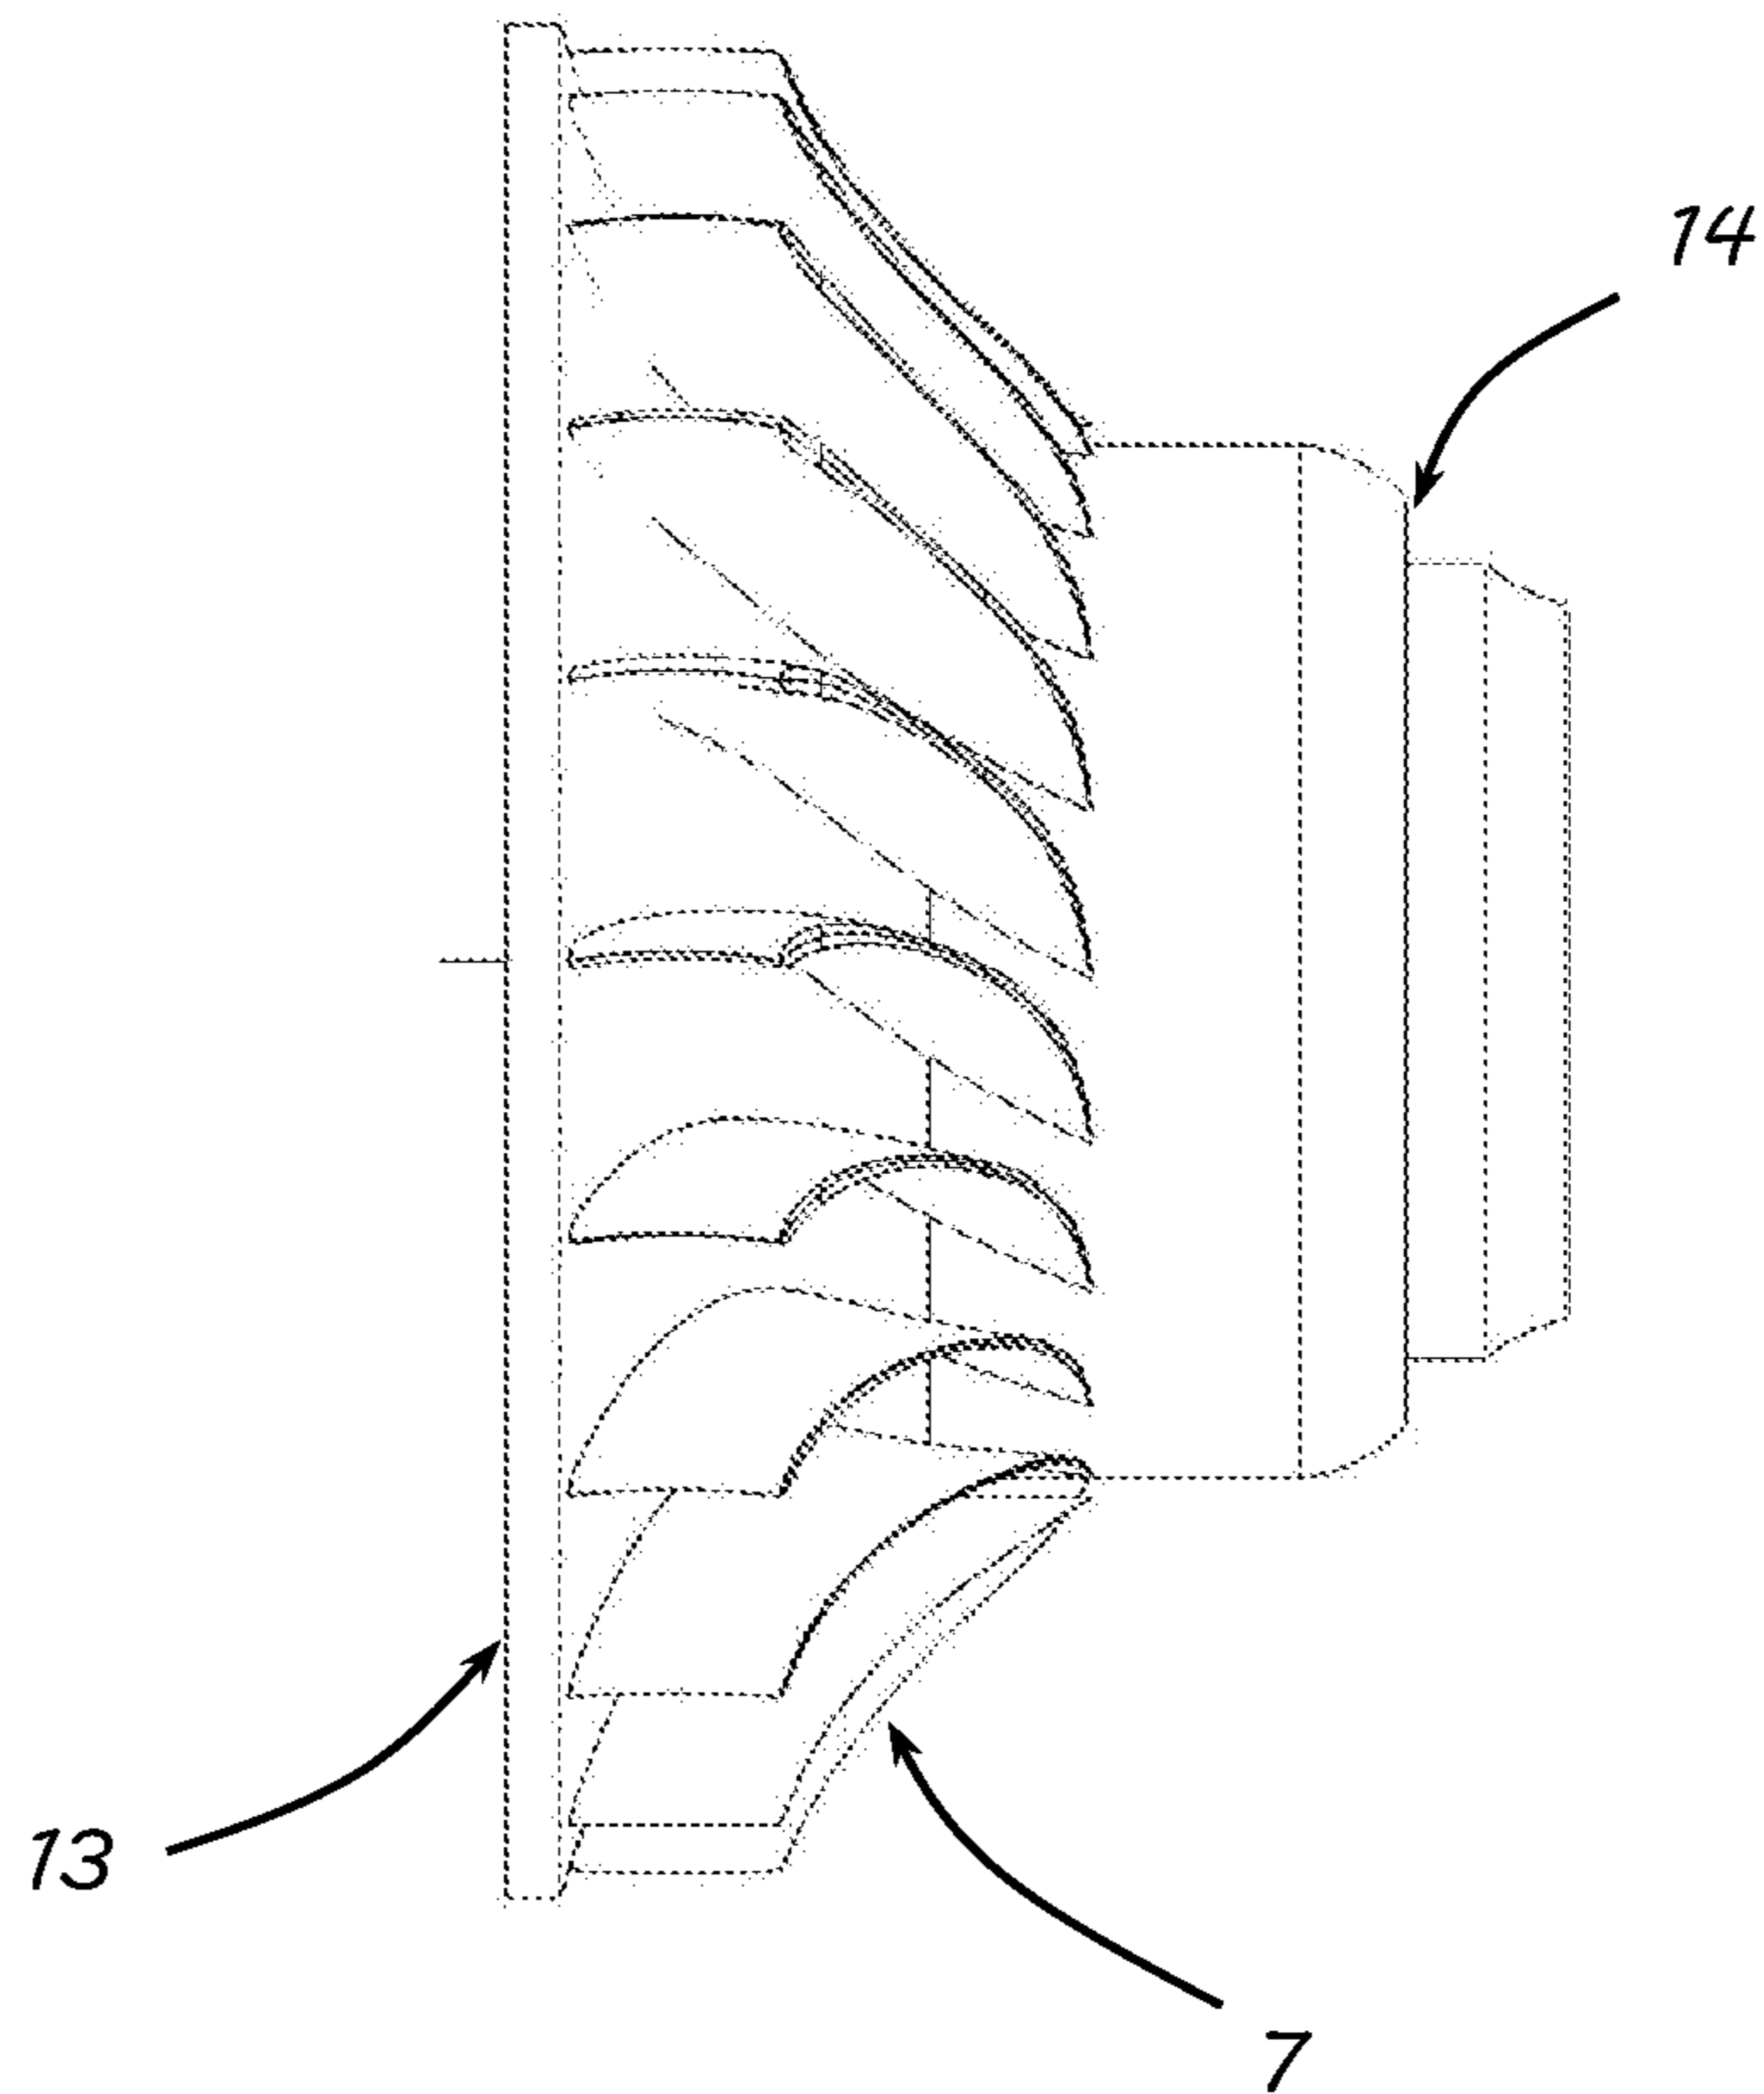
Side View of the Rotor Showing its External Blades, and Seals Locations
